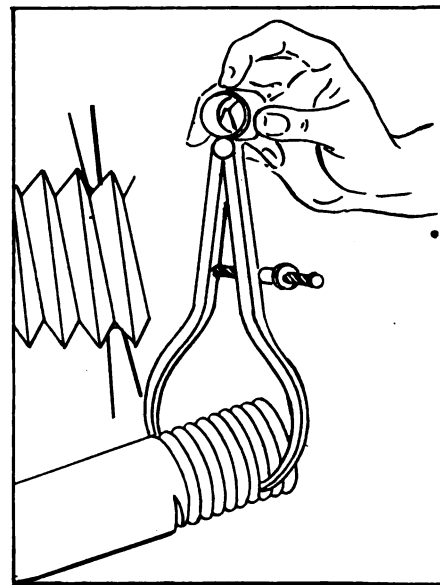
Showing how to use calipers in determining the dimensions of thread
